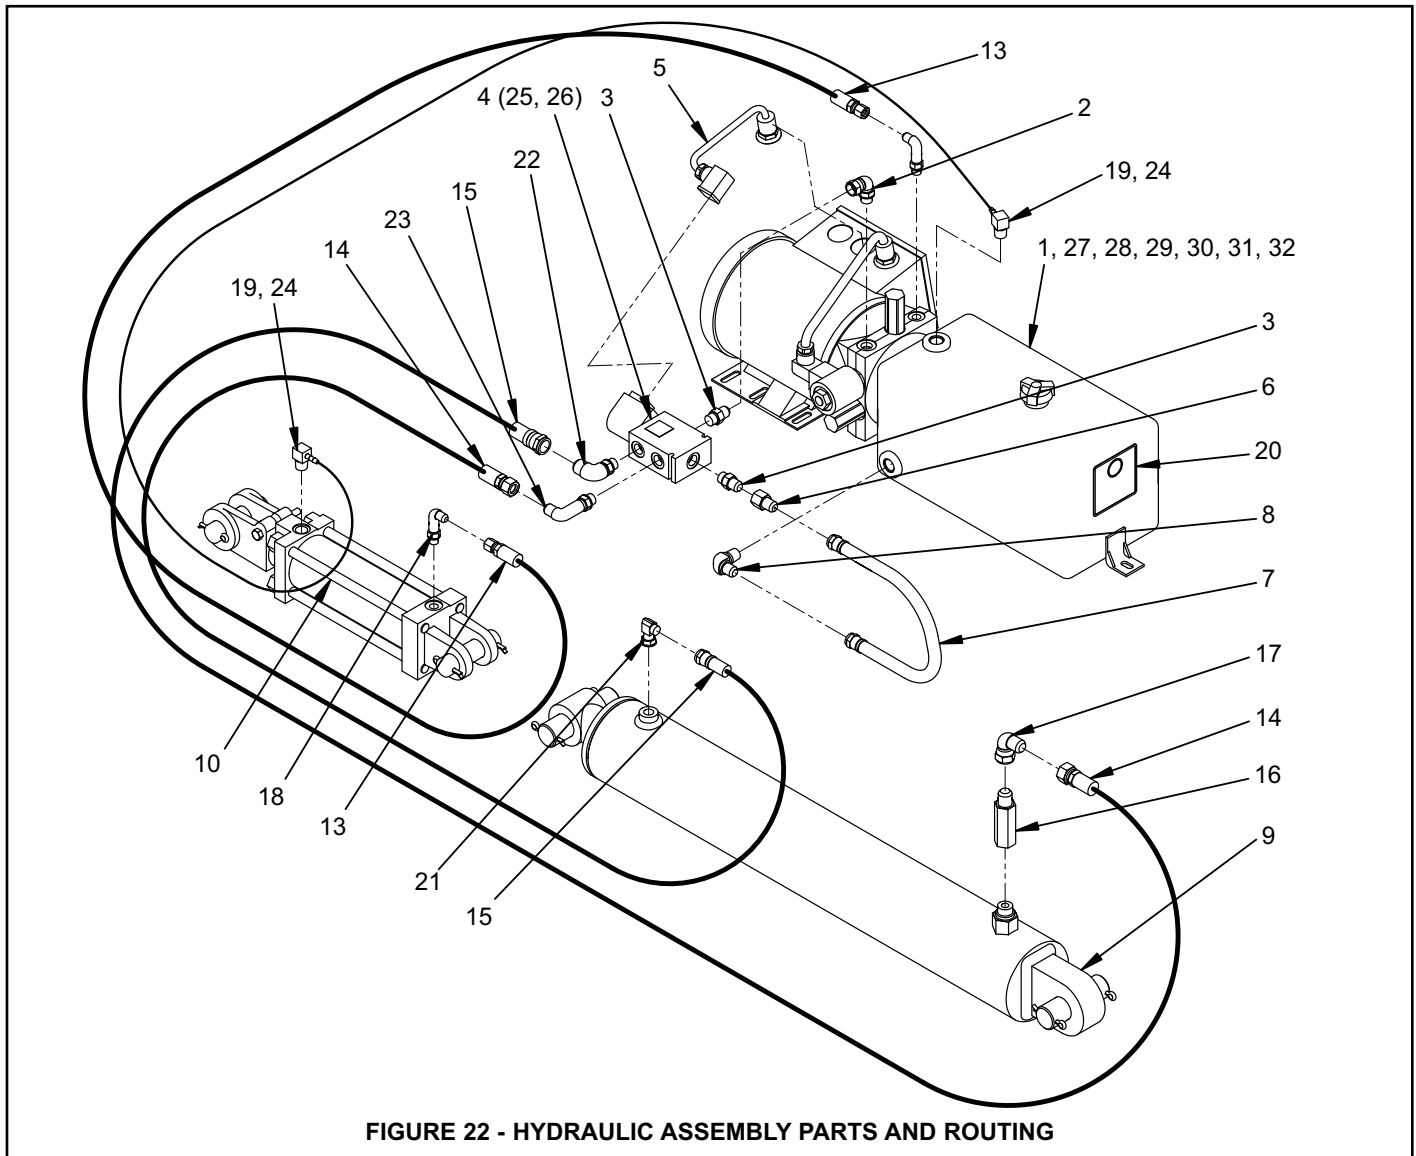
HYDRAULIC ASSEMBLY PARTS AND ROUTING
